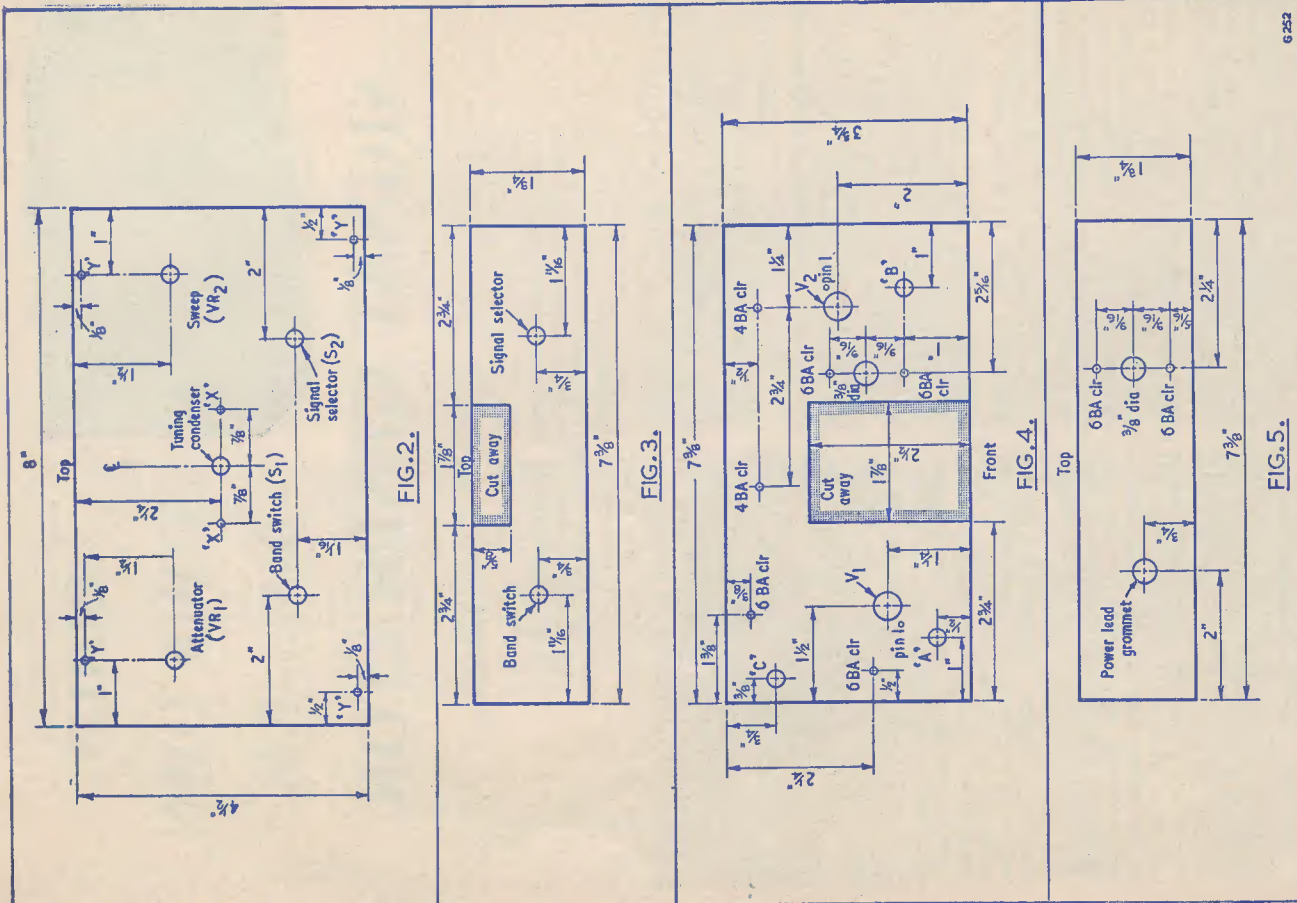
Drilling dimensions for the front panel. Fig. 3. The front apron of the chassis is drilled and cut as shown here. Fig. 4. View looking down on the top of the chassis. The letter references are explained in the text. Fig. 5. The rear apron of the chassis, showing the holes drilled for the WA9 coil and power lead grommet
